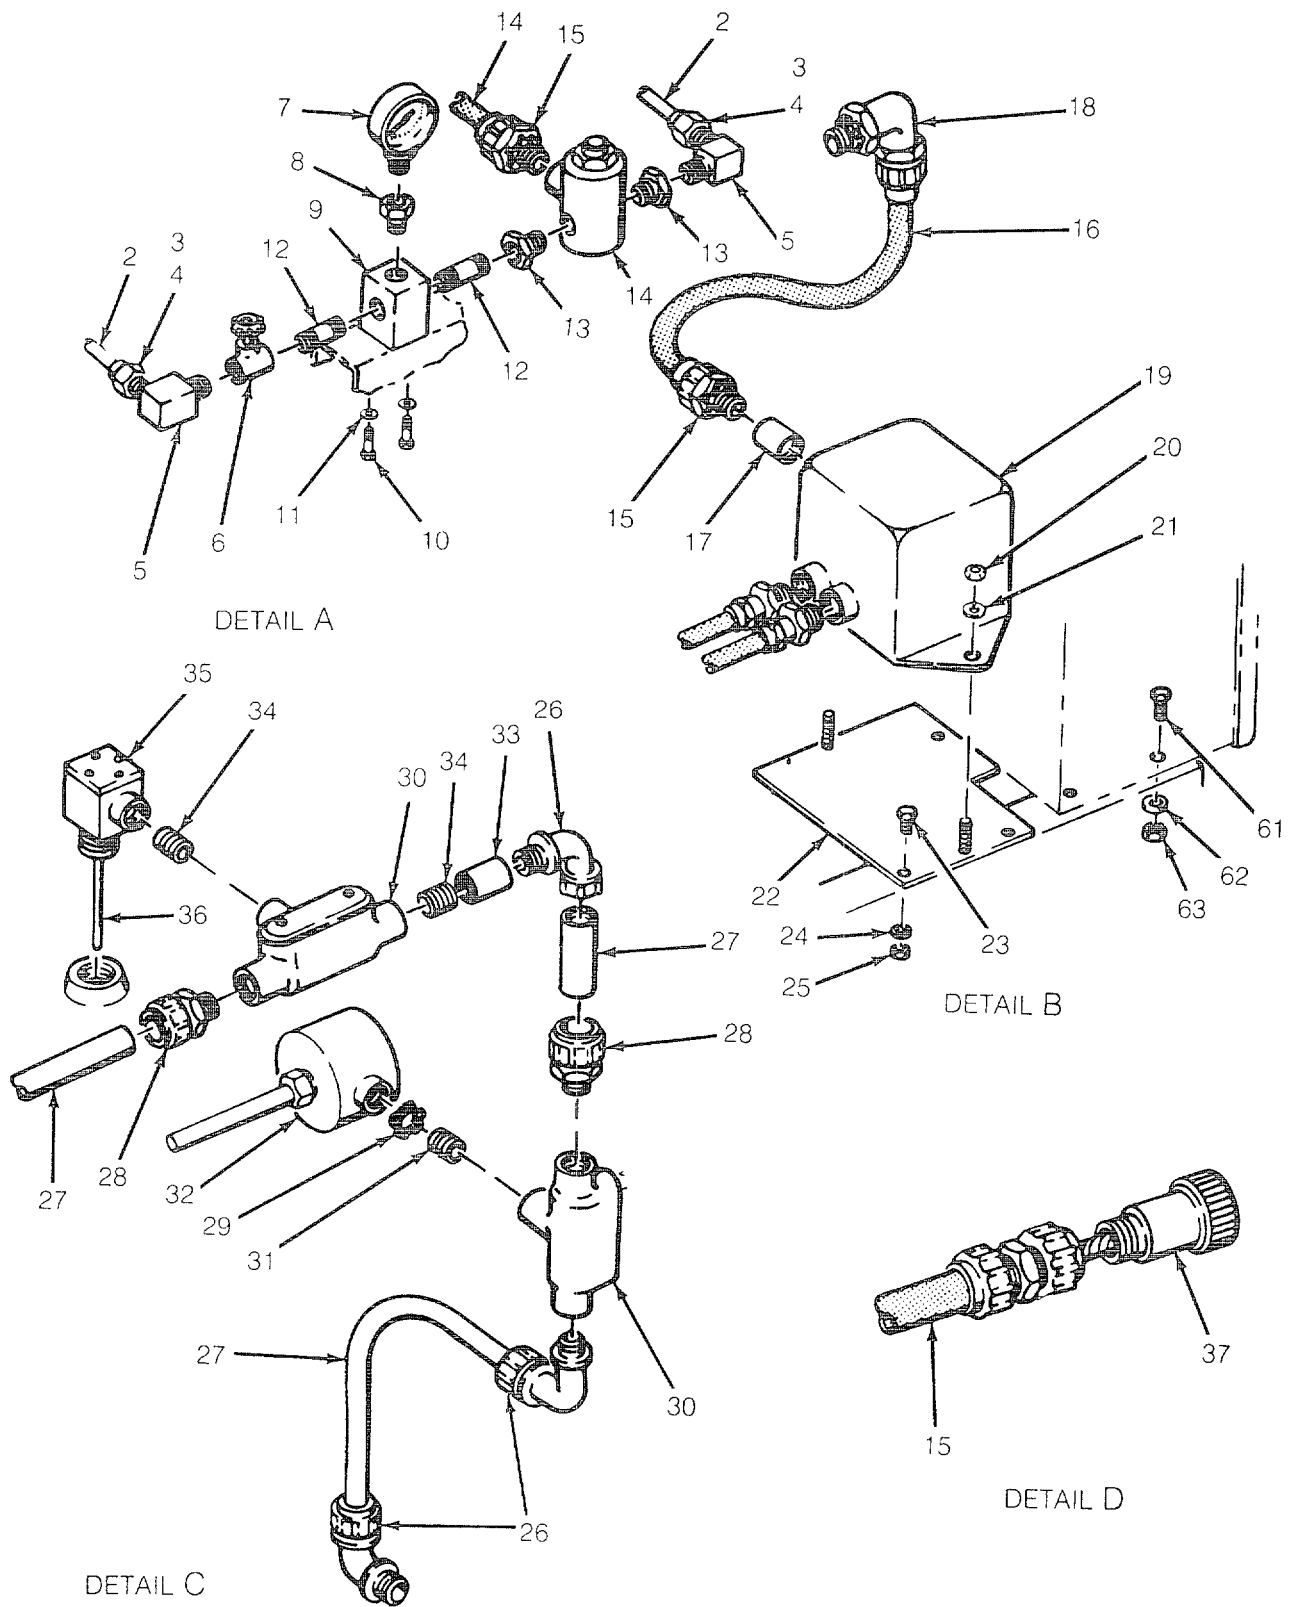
Water Heater Assembly (Sheet 2 of 4)
